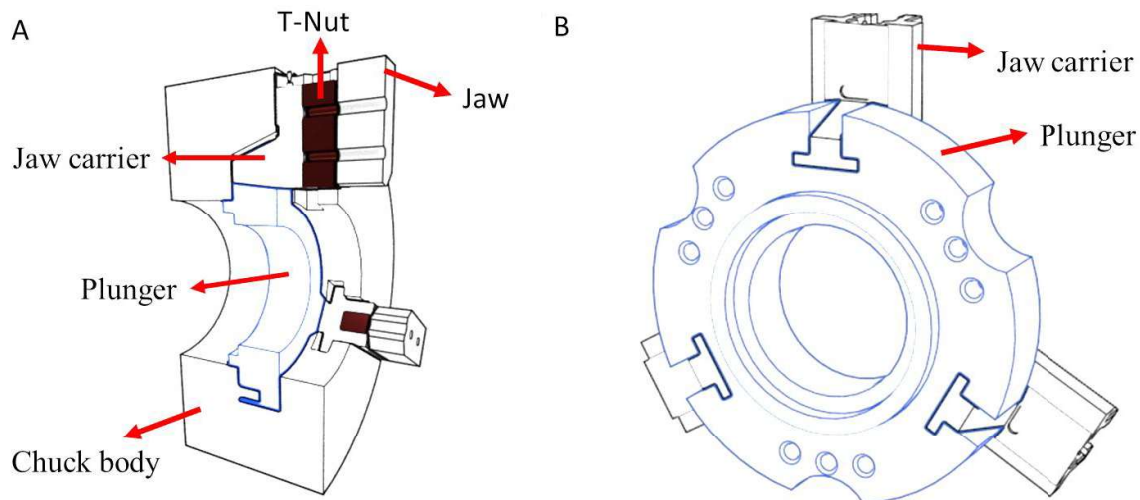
Schematics showing: (a) sectional view the hydraulic lathe chuck, (b) isometric view of jaw-carrier and plunger assembly.
